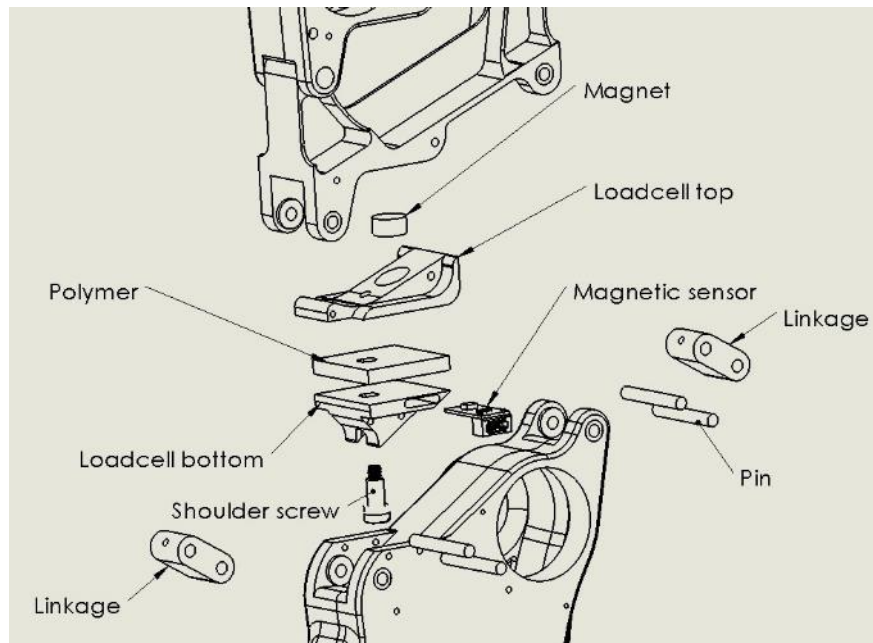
Exploded view of load cell included in belt-chain-chain leg.
